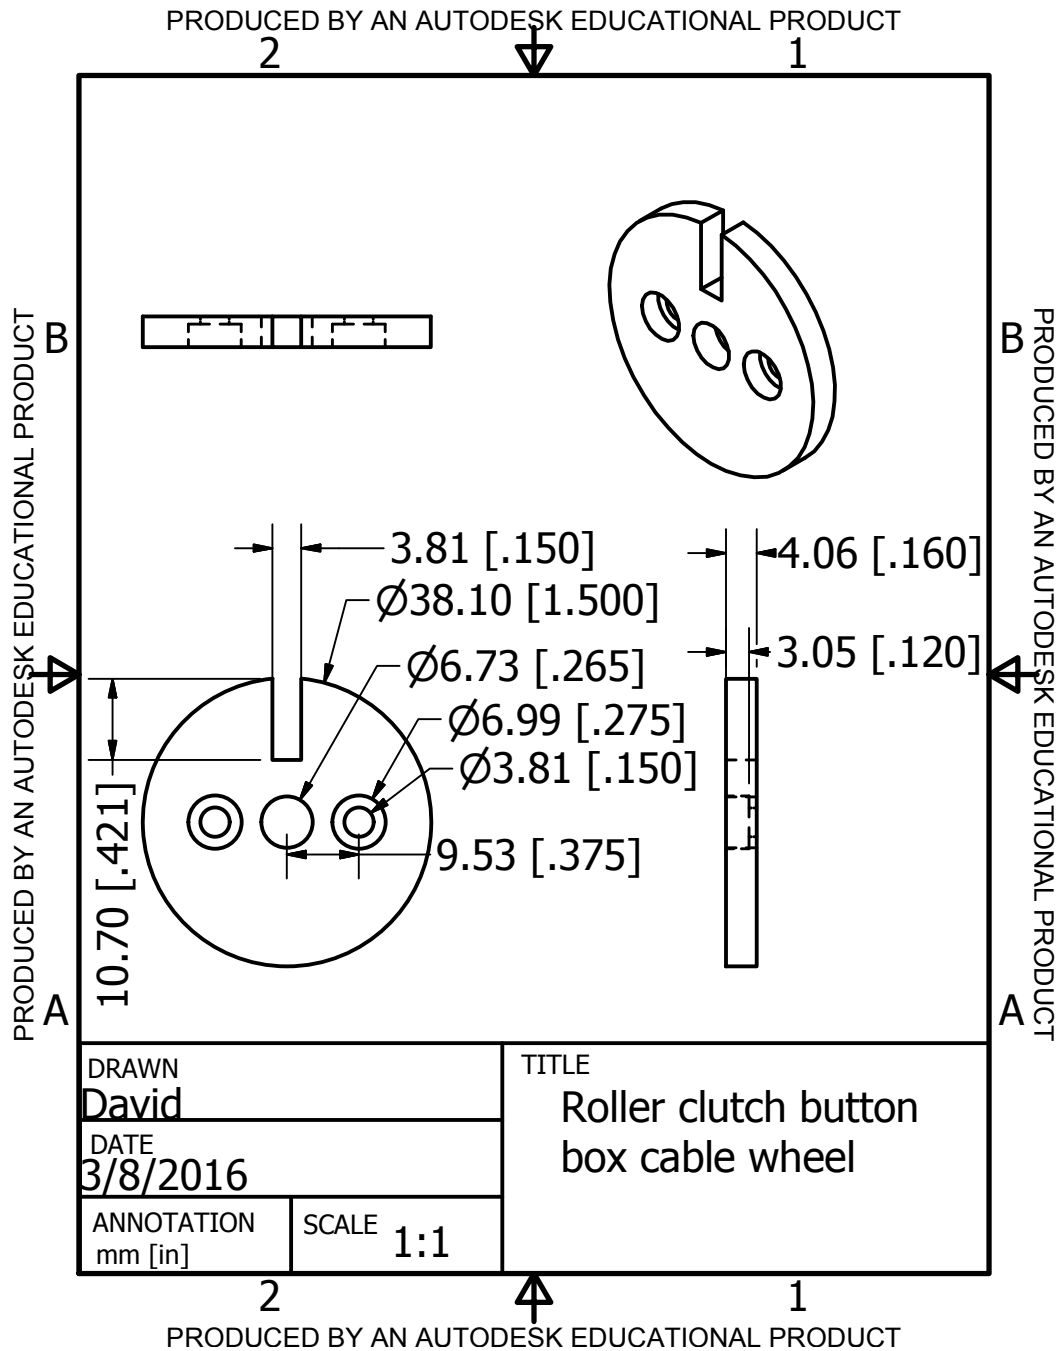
Two 2" 6-32 screws connect in this wheel to the blind assembly forcing this wheel to rotate with the blinds. This wheel wraps and unwraps the ribbon cable that connects to button box.
